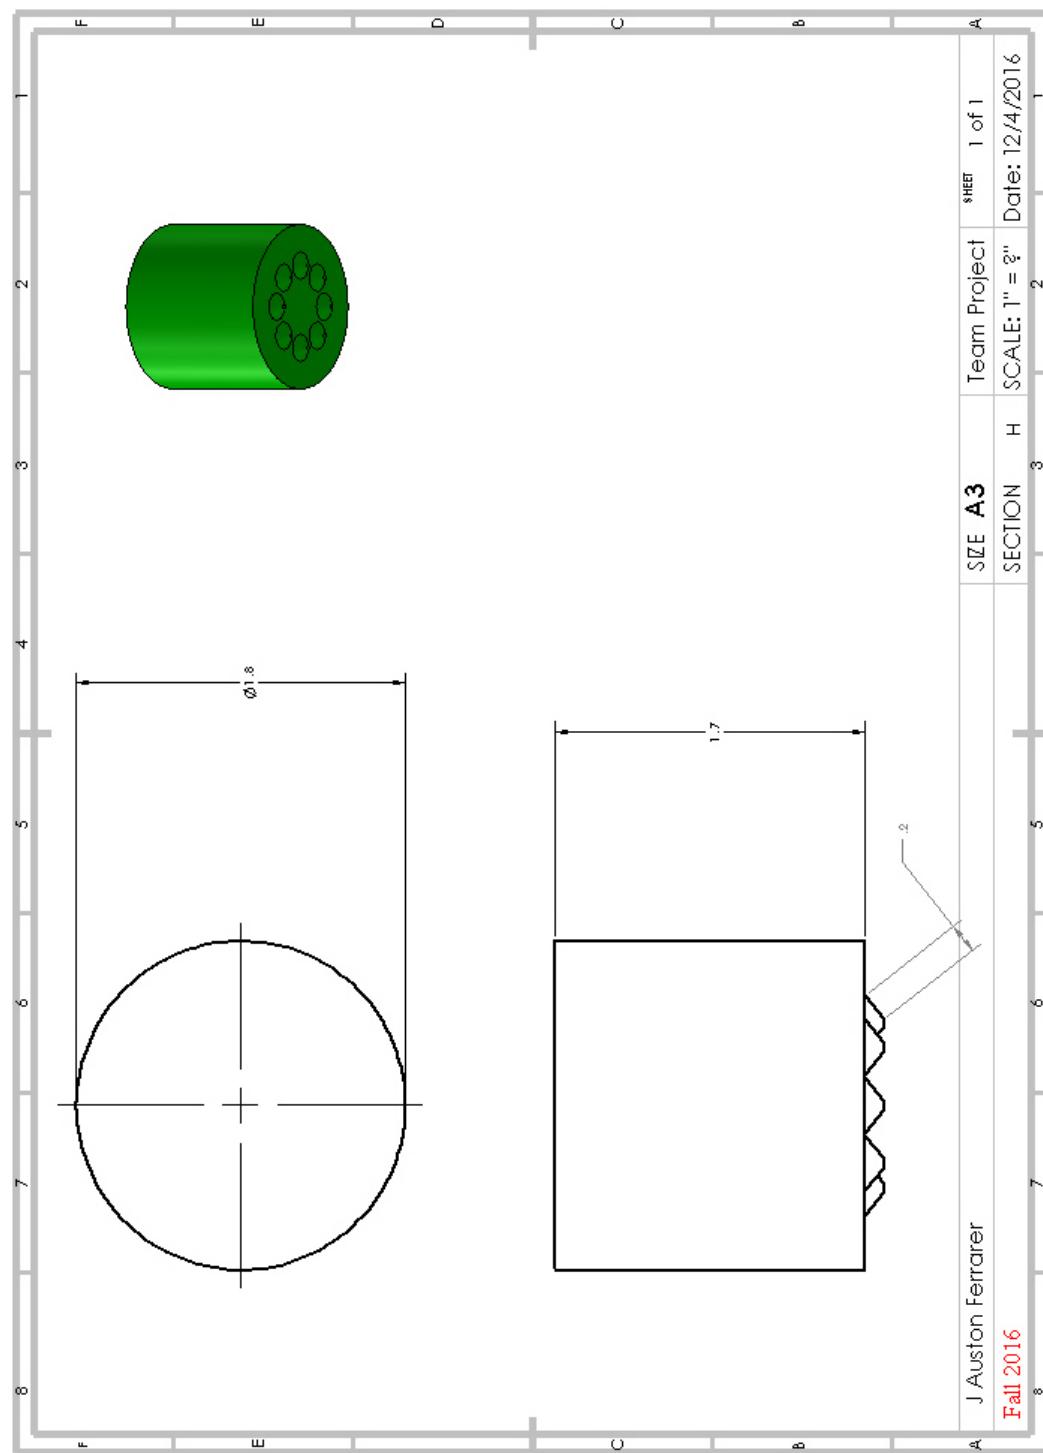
Ferrarer, Auston: Printing Nozel
